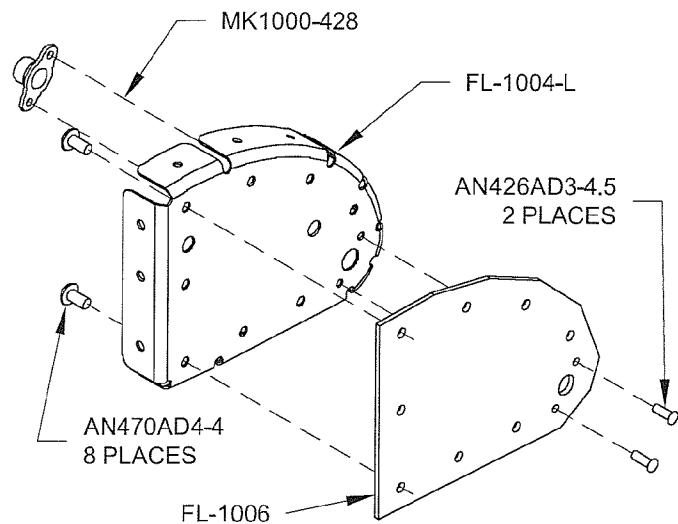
OUTBOARD ROD END RIB SUBASSEMBLY
